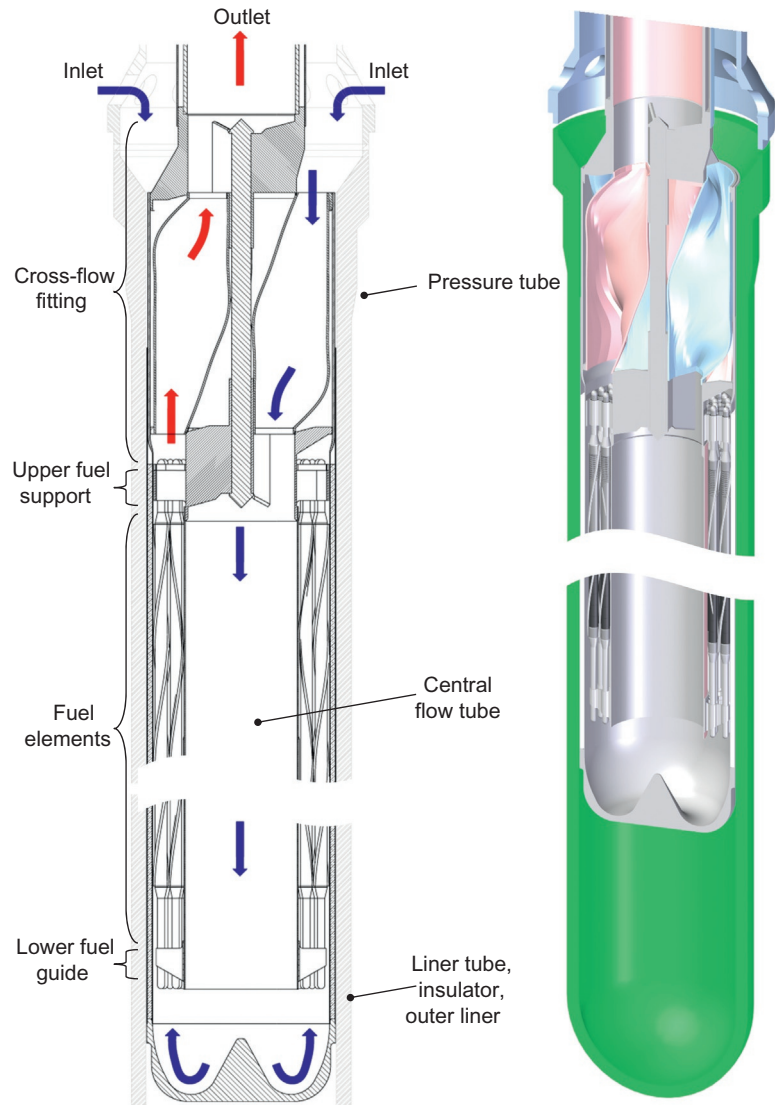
Cross-sectional view of the 64-element fuel bundle concept inside of the pressure tube
